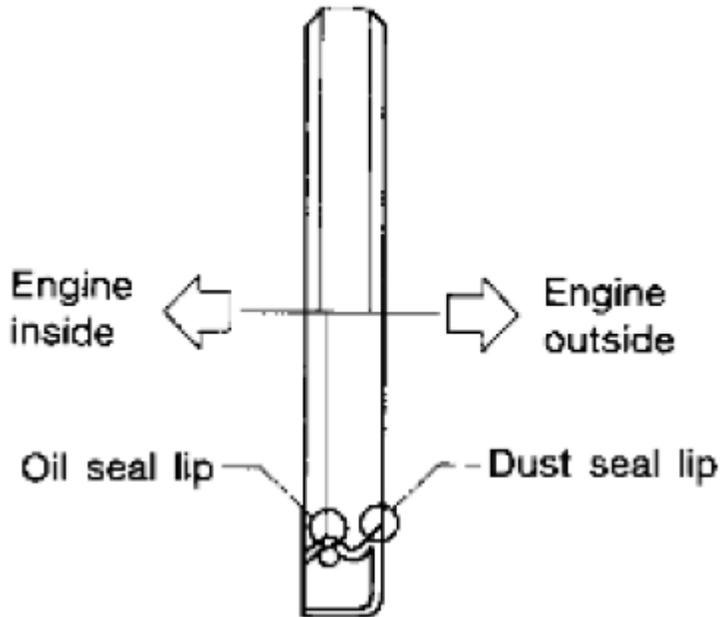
Identifying Seal Lip Orientation For Installing Rear Oil Seal
